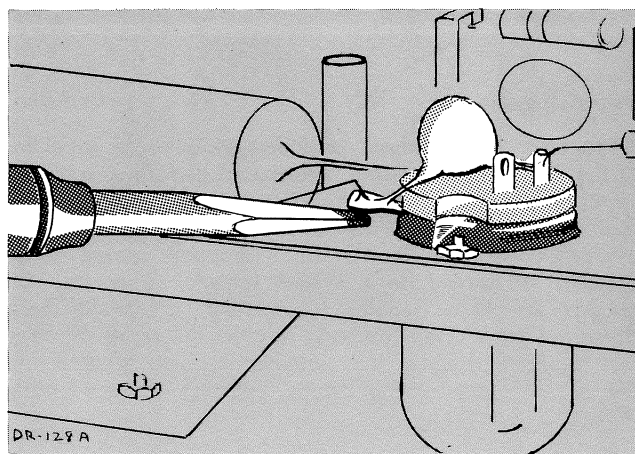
Soldering to a terminal. Note the slight fillet of solder—exaggerated for clarity—formed around the wire.
